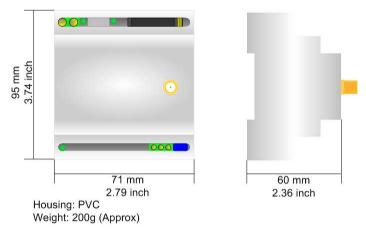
Mechanical dimensions scheme for HD67300-011-B6, HD67300-021-B6, HD67300-101-B6
